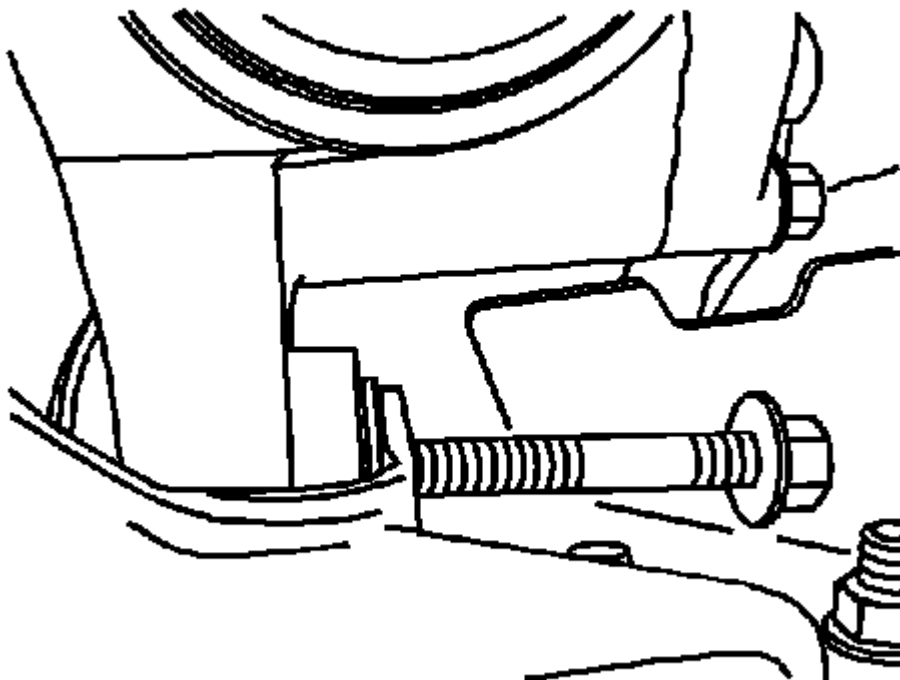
View Of Differential Carrier Lower Mounting Bolt
